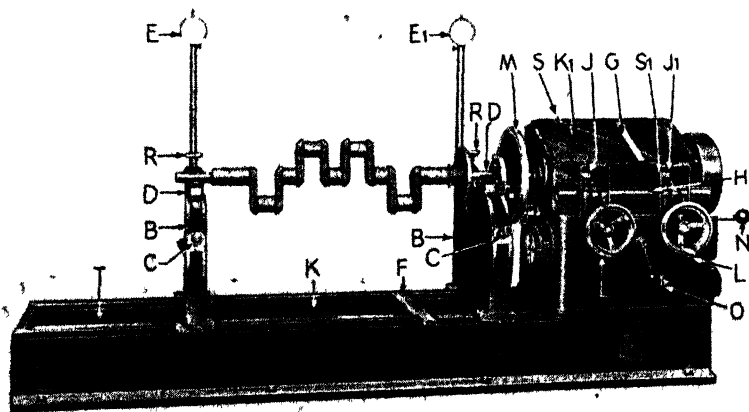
THE AVERY DYNAMIC BALANCING MACHINE, SHOWING CRANKSHAFT UNDER TEST
